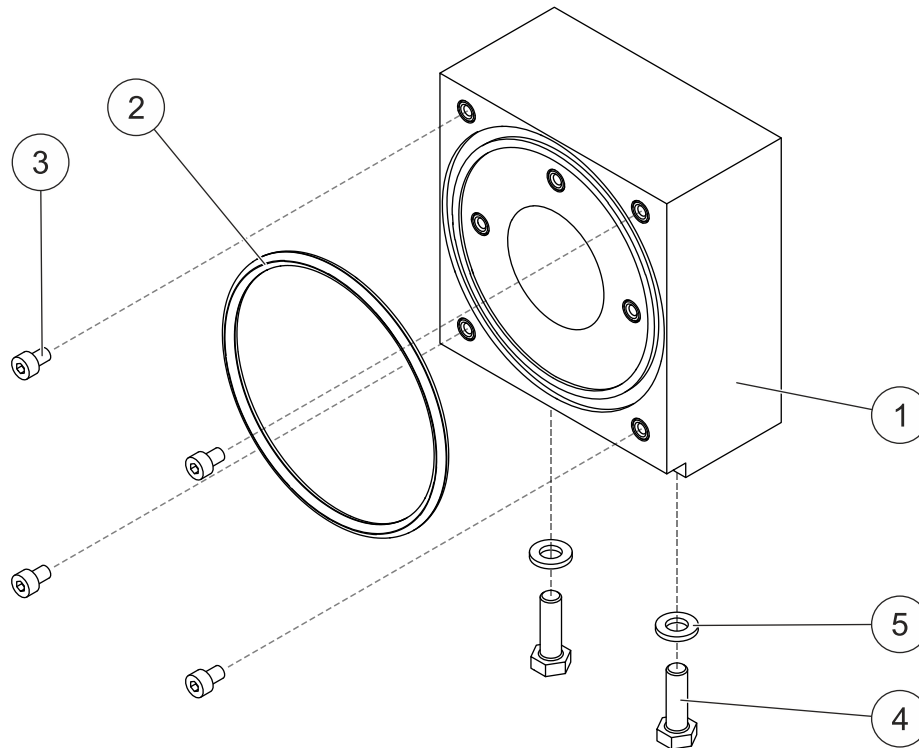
Sub-assembly motor flange PQ15T-HT-NT
